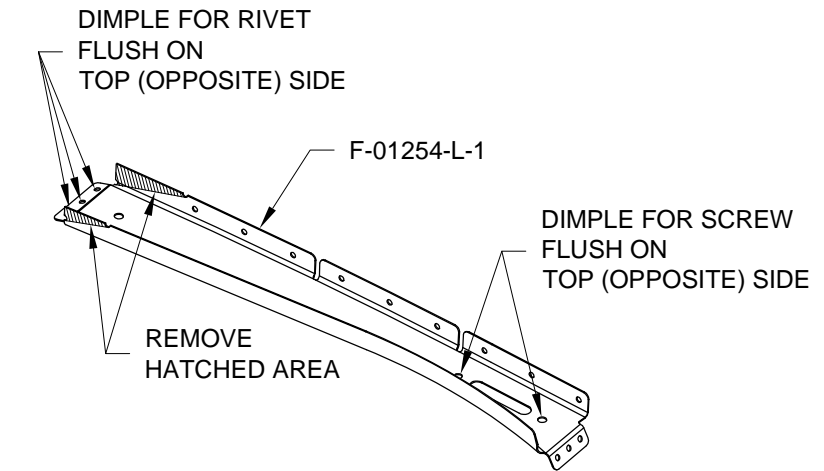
TRIMMING THE F-01254-L-1 & -R-1
